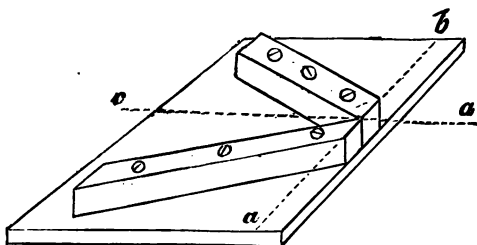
MITRE BLOCK AND SHOOTING BOARD.
